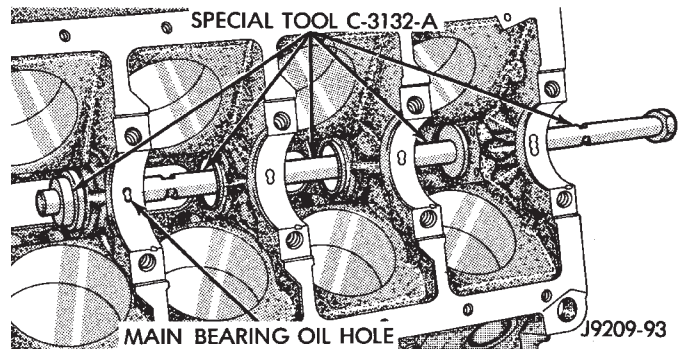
Camshaft Bearings Removal/Installation with Tool C-3132-A
